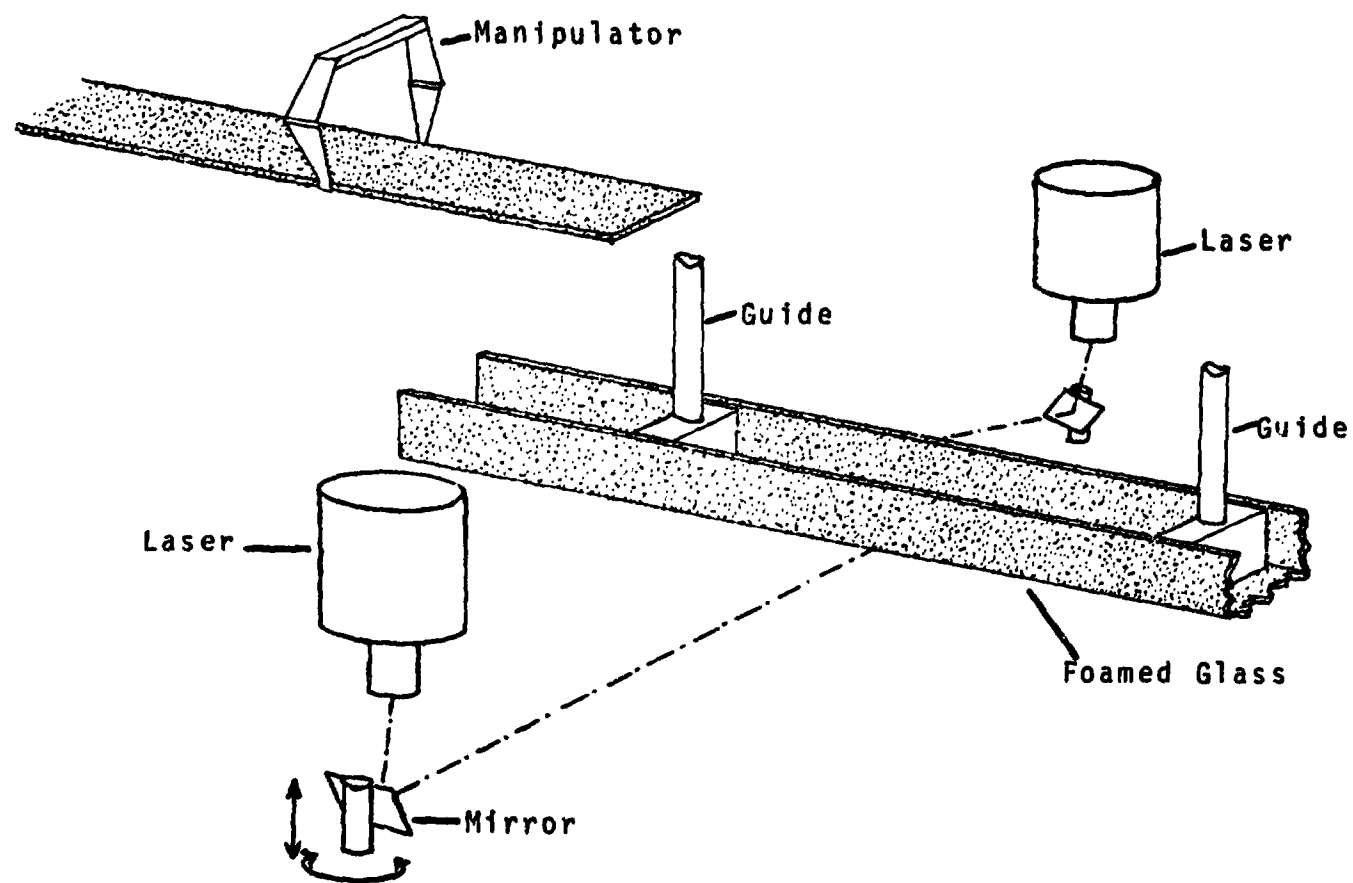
WAVEGUIDE ASSEMBLY
